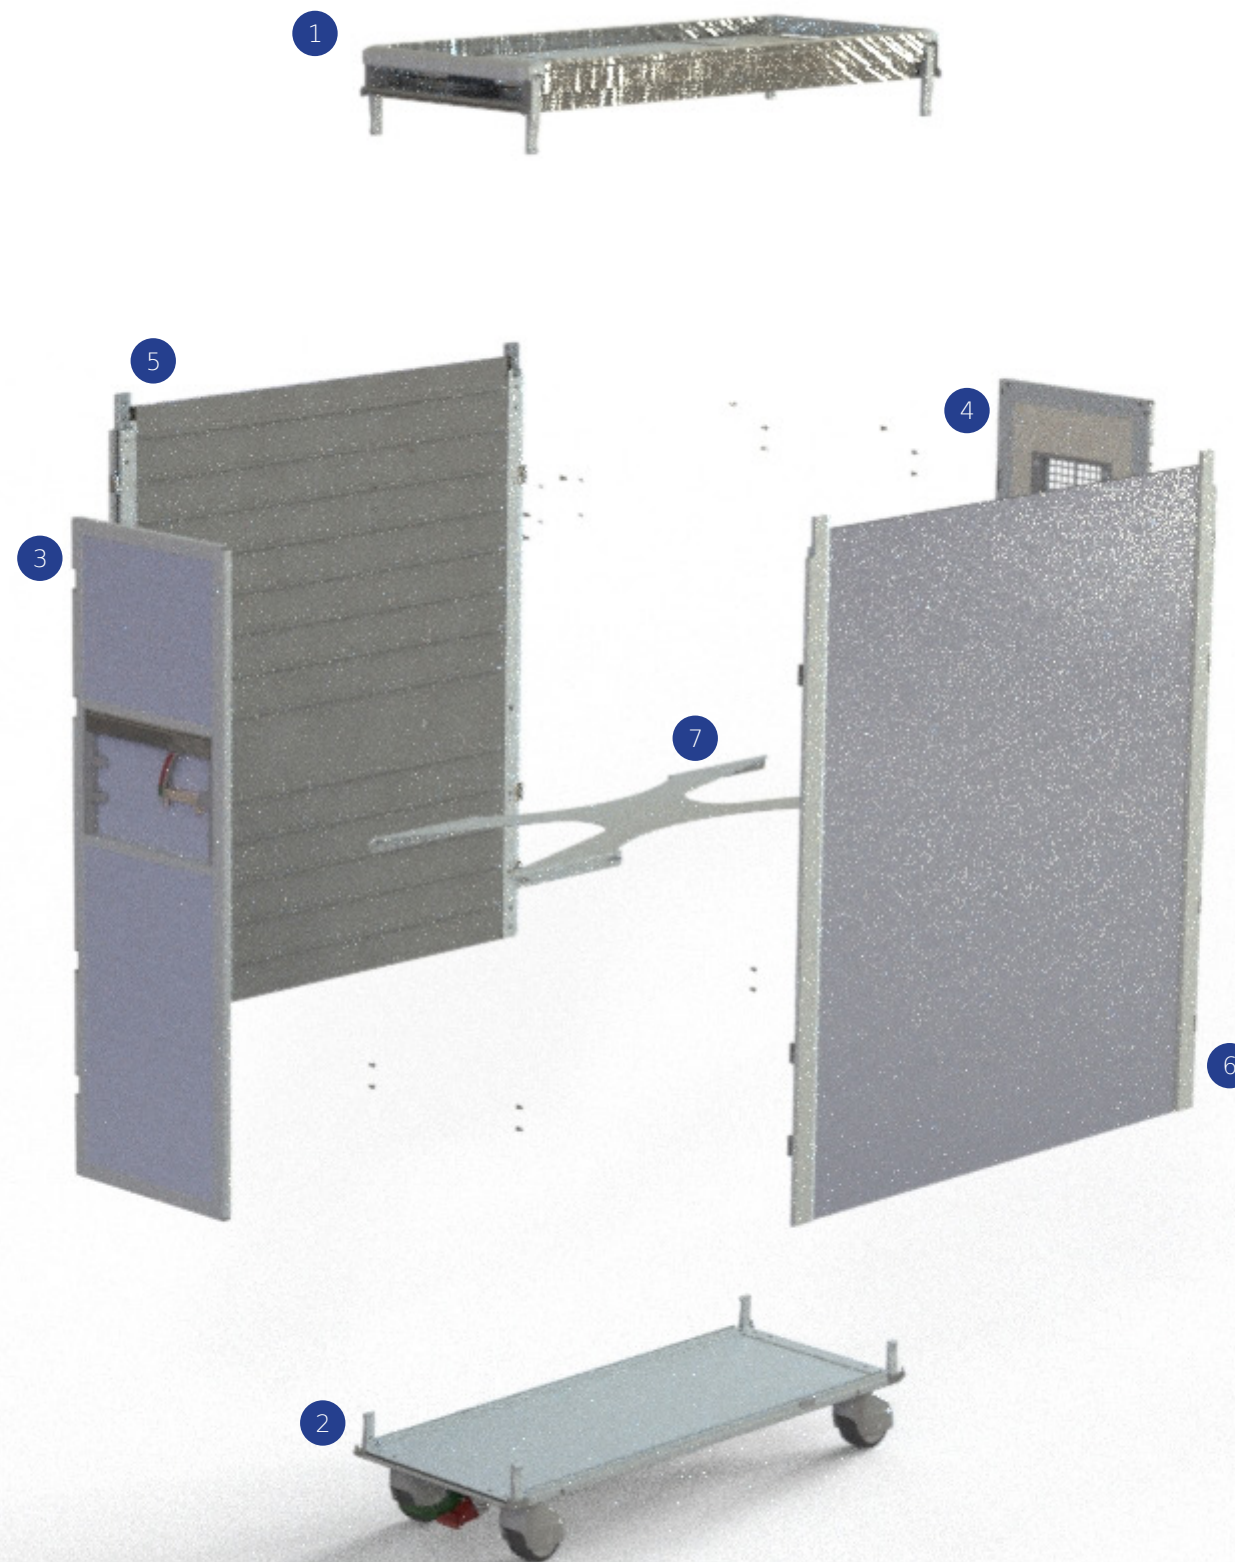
Exploded view Driessen Full Size Premium Meal Trolley
